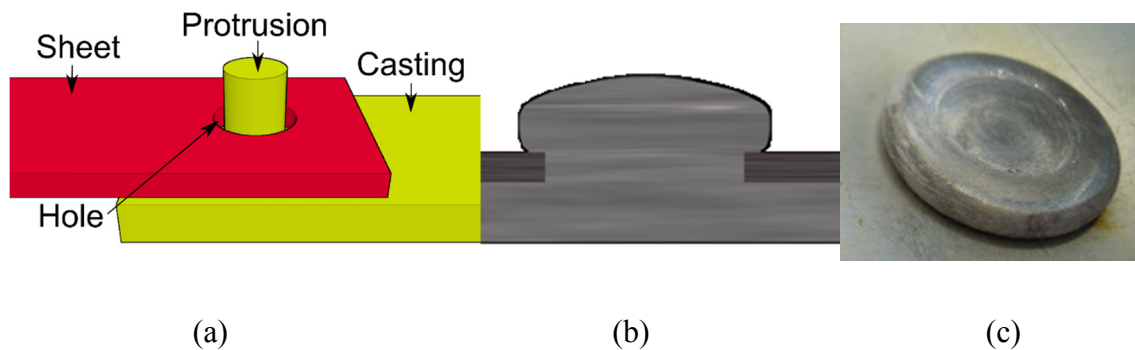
UPJ process, (a). a view of two assembled components prior to UPJ process, (b) a sliced view of a UPJ joint formed by axially compressing the cylindrical protrusion where a mushroomed head entraps the sheet metal between the head and the casting, (c) a photo of the protrusion head as part of a successful UPJ joint made from a cast magnesium alloy.
